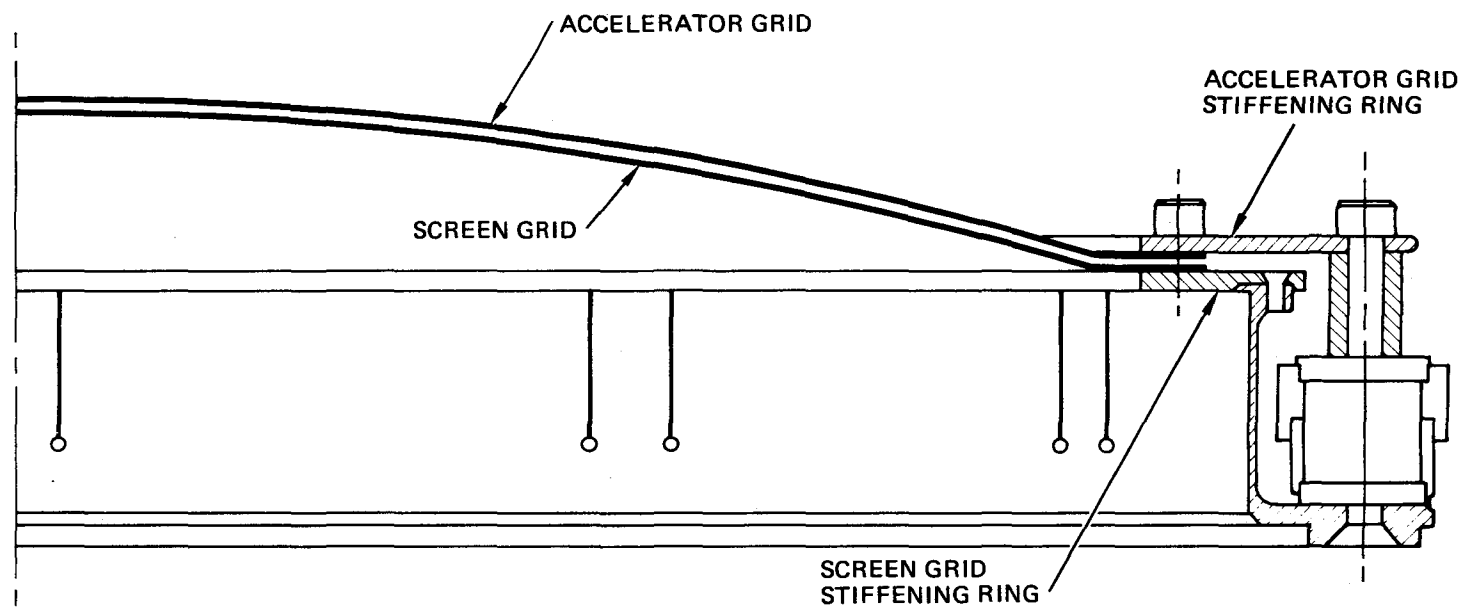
Cross section of the ion accelerator grid assembly for the J-series 30-cm thruster.
